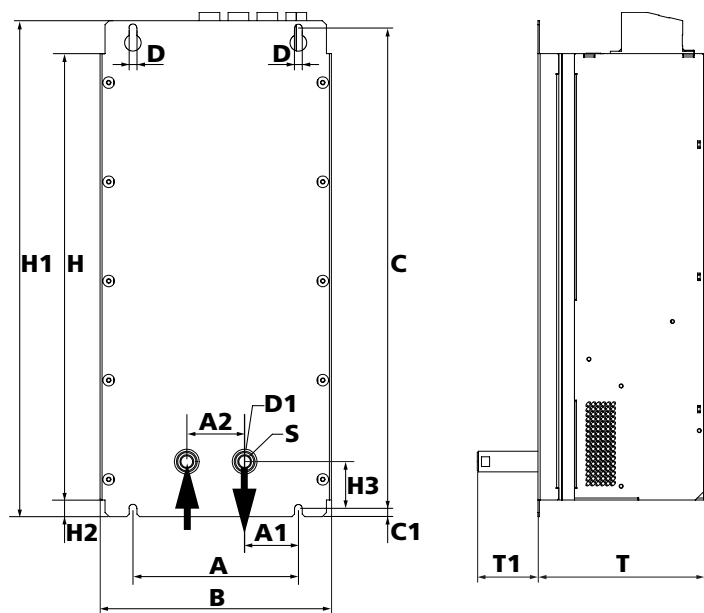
Dimensional drawing of housing with liquid cooling, schematic representation for BG3 to BG6a
